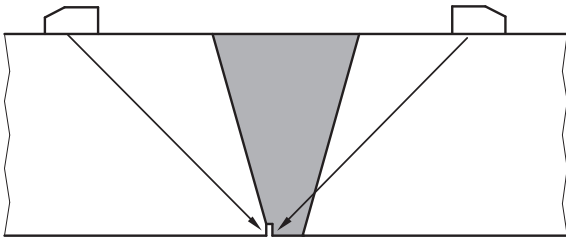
Location of notches and sound beam directions for the test of welded joints between ferritic steels and between austenitic steels
